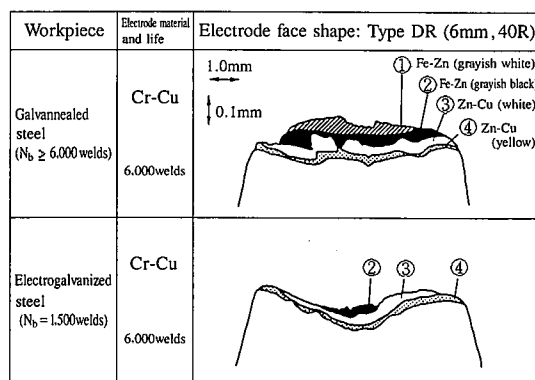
Electrode face shape and cross-sectional alloy layer composition after welding
